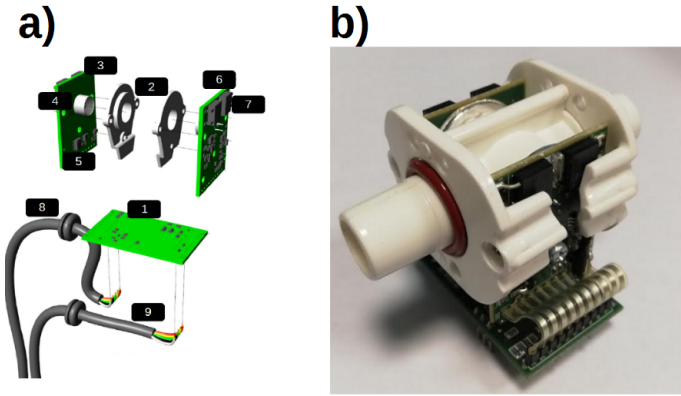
a) Exploded drawing of the CO₂ sensor: 1) CPU board; 2) aluminum rings; 3) emitter board; 4) InAsSb/InAs element; 5) digital temperature sensor; 6) receiver board; 7) heating resistances; 8) Flow sensor communication cable; 9) power supply/RS-485 cable. b) Assembly of the developed CO₂ and plastic cuvette.
